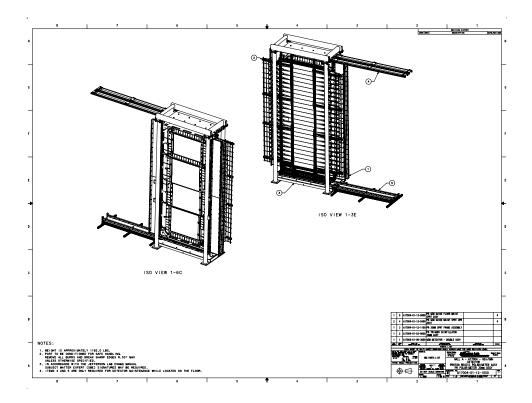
CAD model of one (beamline side) GEn-RP polarimeter side detector assembly. It contains UVa X-Y GEM layers and one 24 paddle hodoscope array. The second side detector is a mirror image. The rail extensions shown in this image are used only for installation or repairs, and are removed for production. The two UVa X-Y GEM layers are on a single rail mount, and the hodoscope array is on a second rail mount.
